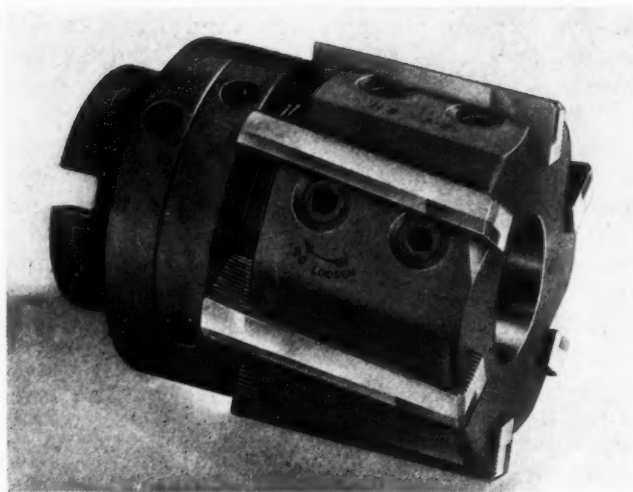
A Cam-lock Serrated-blade Reamer Having Tungsten-carbide Blades
